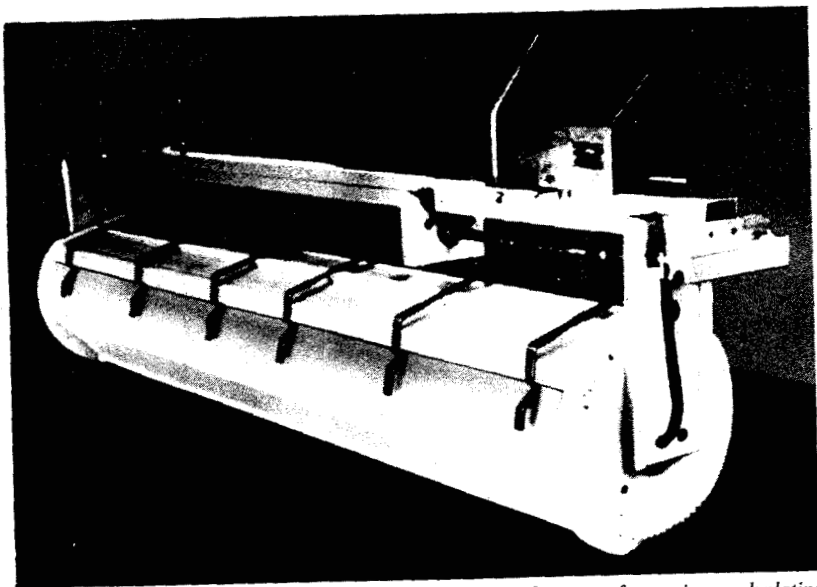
Special length barrel assembly for plating elongated parts or for use in a rack plating line.
